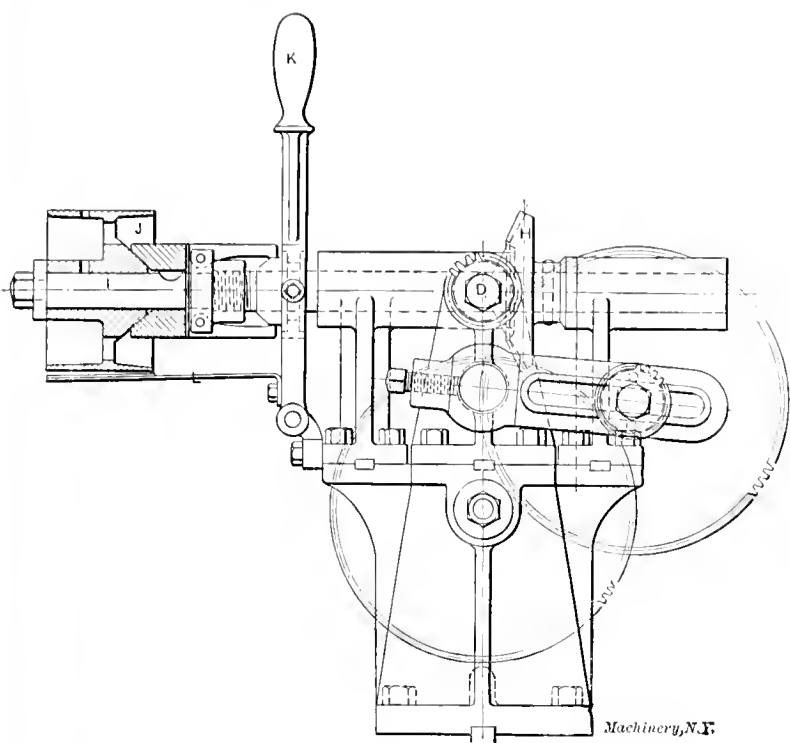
End View of the Spindle and Cam Shaft Driving Mechanism.
